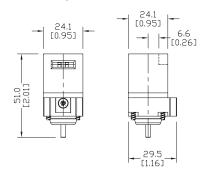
90° adjustable head with shaft hinge interlock - SP2K72, SDM2K72 models
